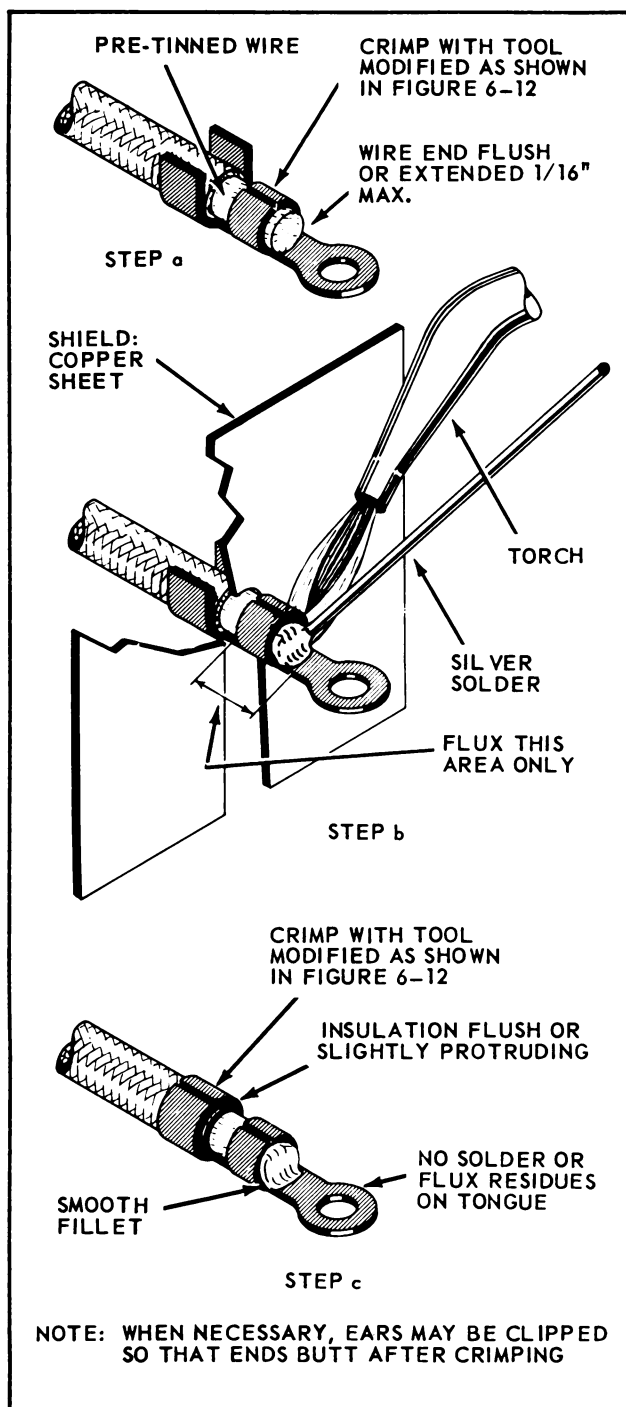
Silver Soldering Thermocouple Wire To Terminal
